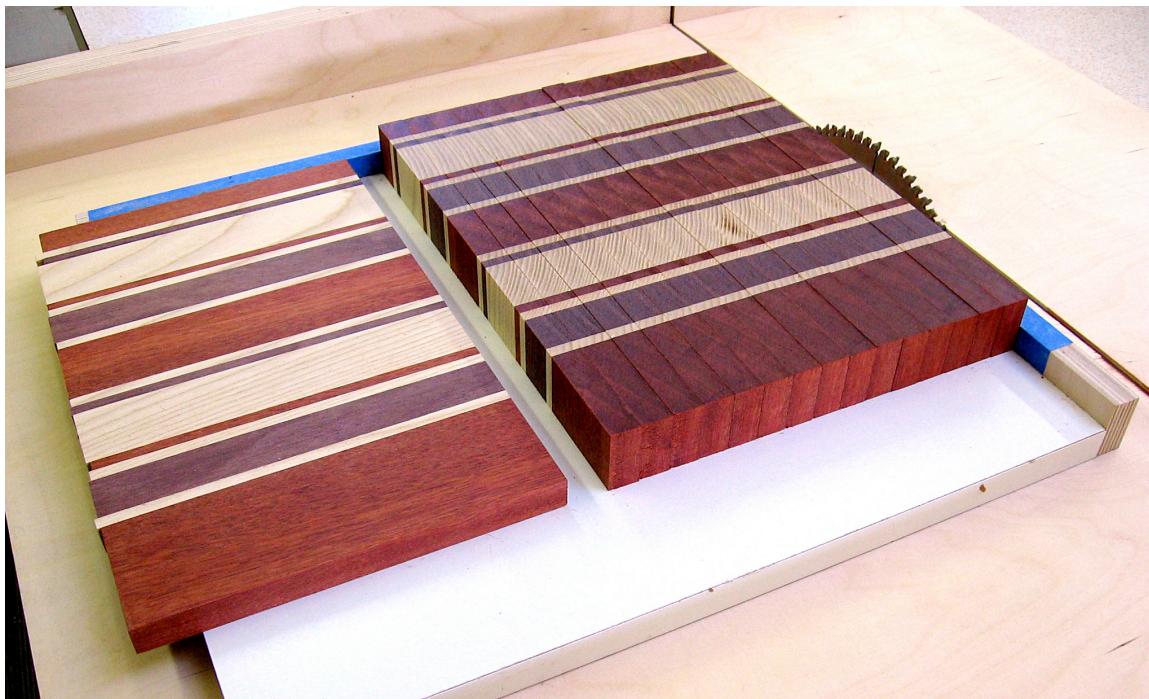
Making Cutting Board Field Strips from the Field Panel
